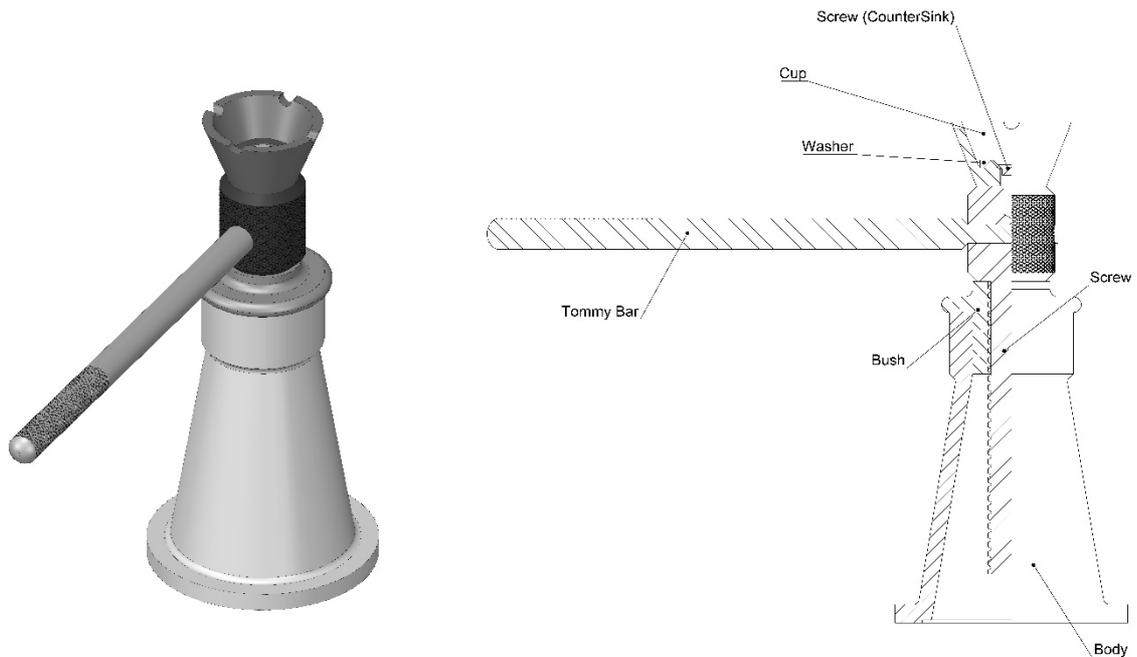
Three-dimensional model and sectional view of screw jack
